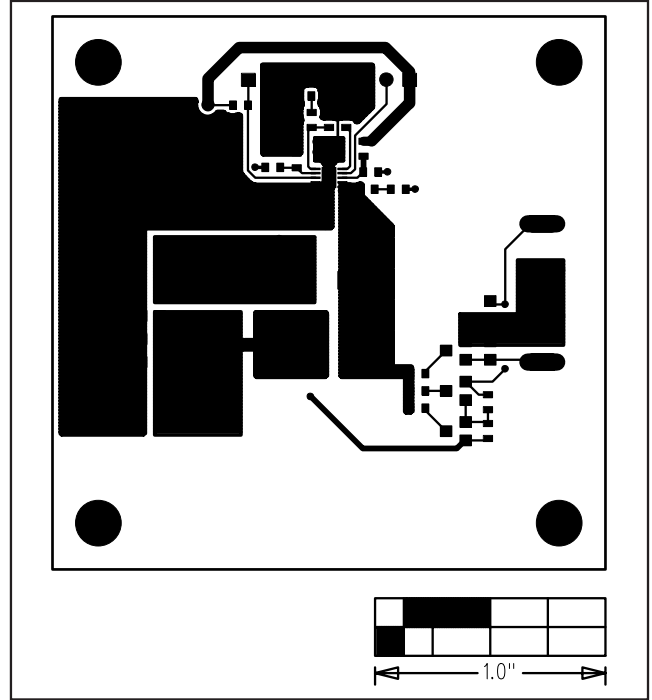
MAX17062 EV Kit PCB Layout—Component Side
